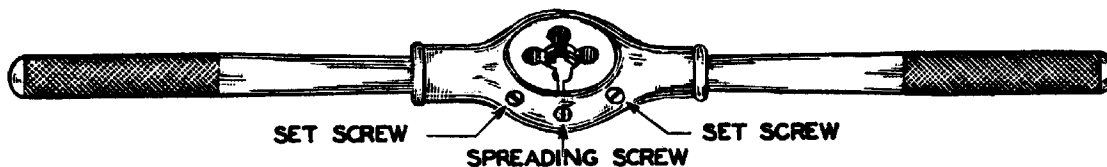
DIE HOLDER WITH A SPLIT DIE INSERTED
